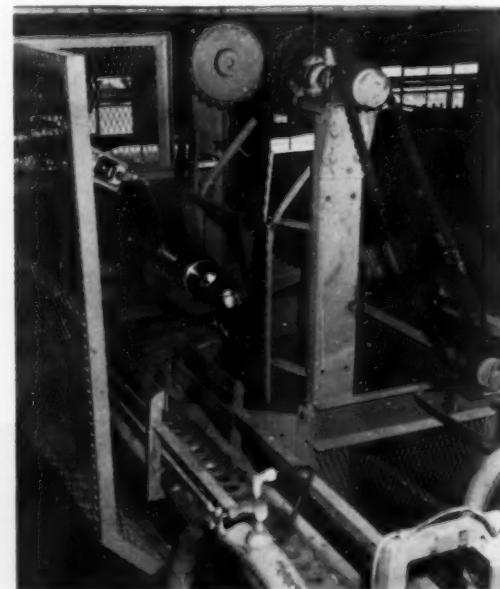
Elevator for transferring pipe from cantilever arms to work racks.
